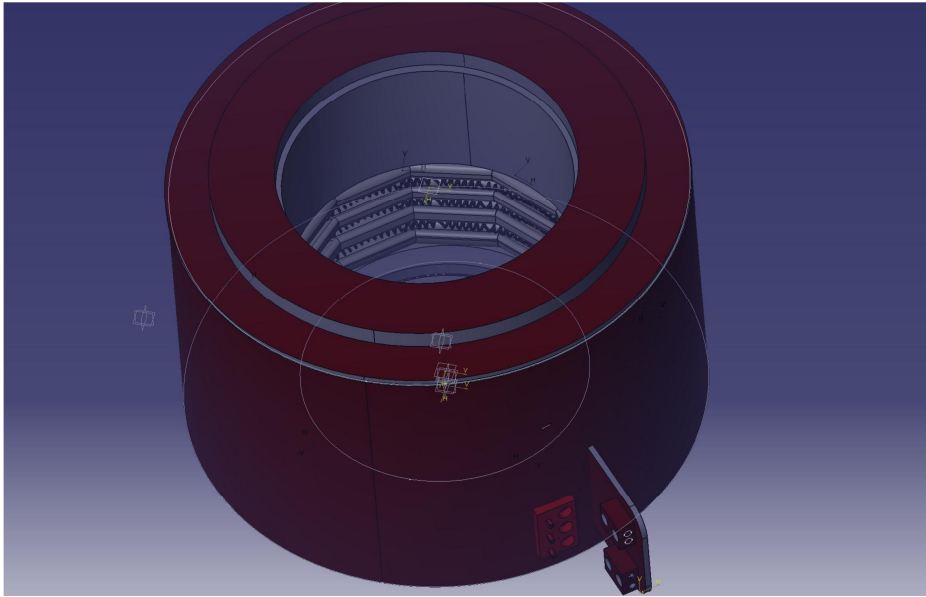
The three dimensional drawing of the furnace constructed for large scale tests.
